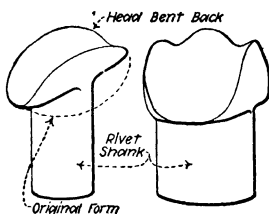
Iron rivets with heads bent back without cracking.
